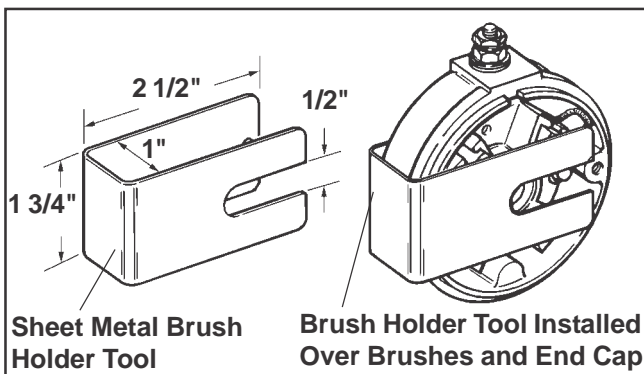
Brush Holder Tool (Style "A" End Cap).
